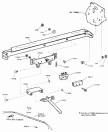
EXPLODED VIEW OF THE MECHANICAL ASSEMBLY
